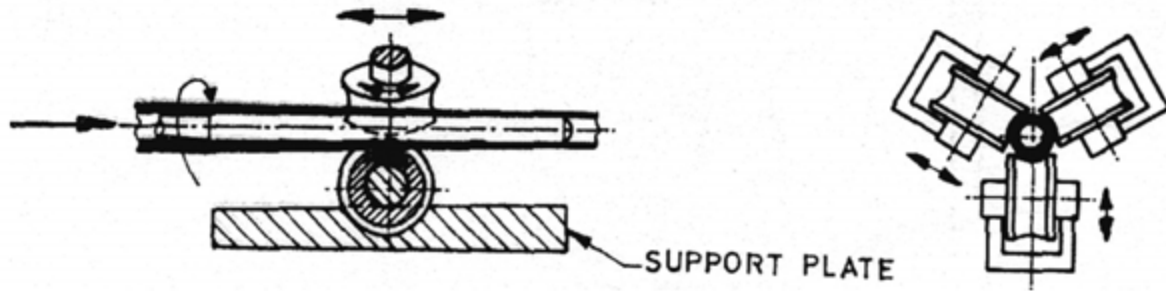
Pilgering: three-roller mills (high pressure tube reducer type).
